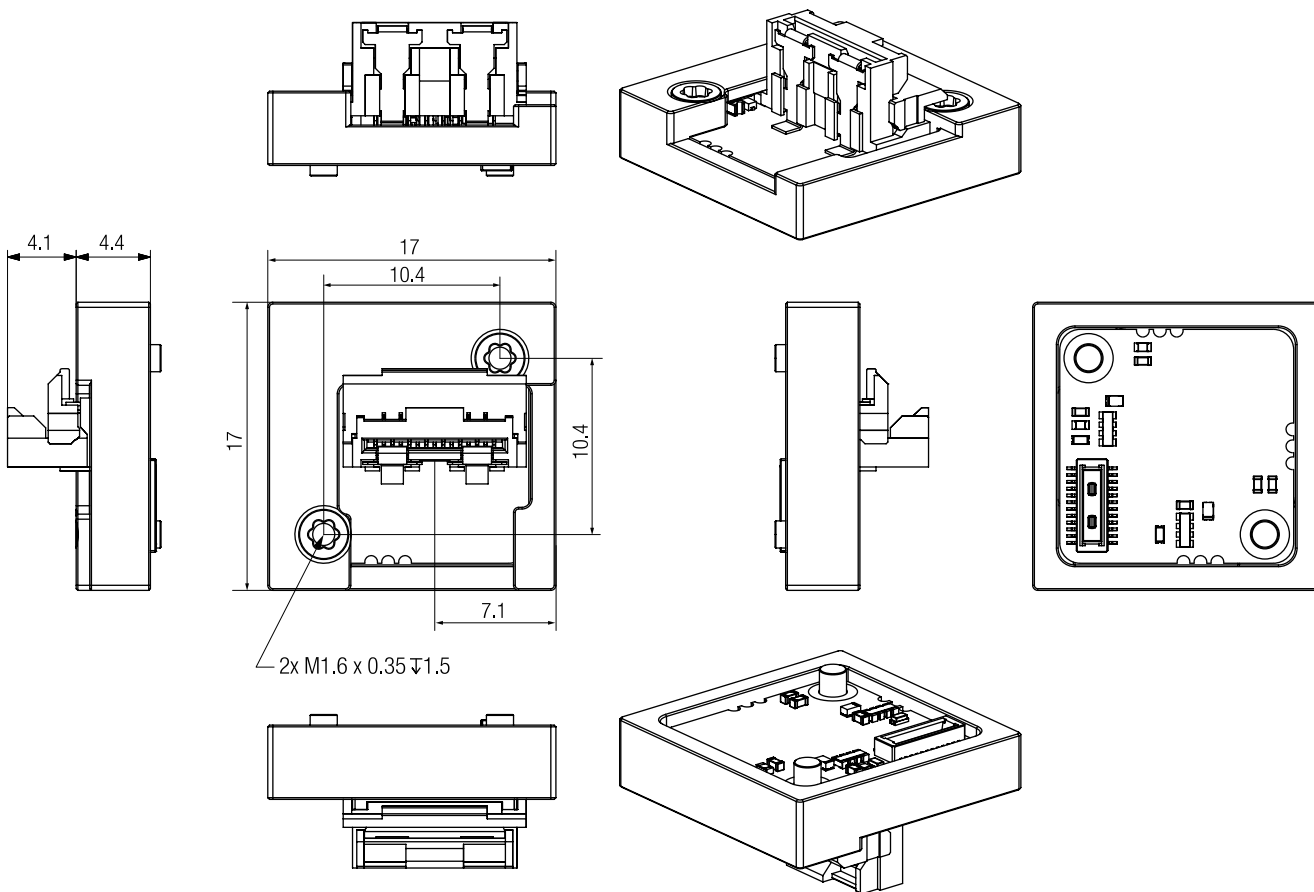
Dimensional drawing of ADPT-MU-17X17-CX3-FV
